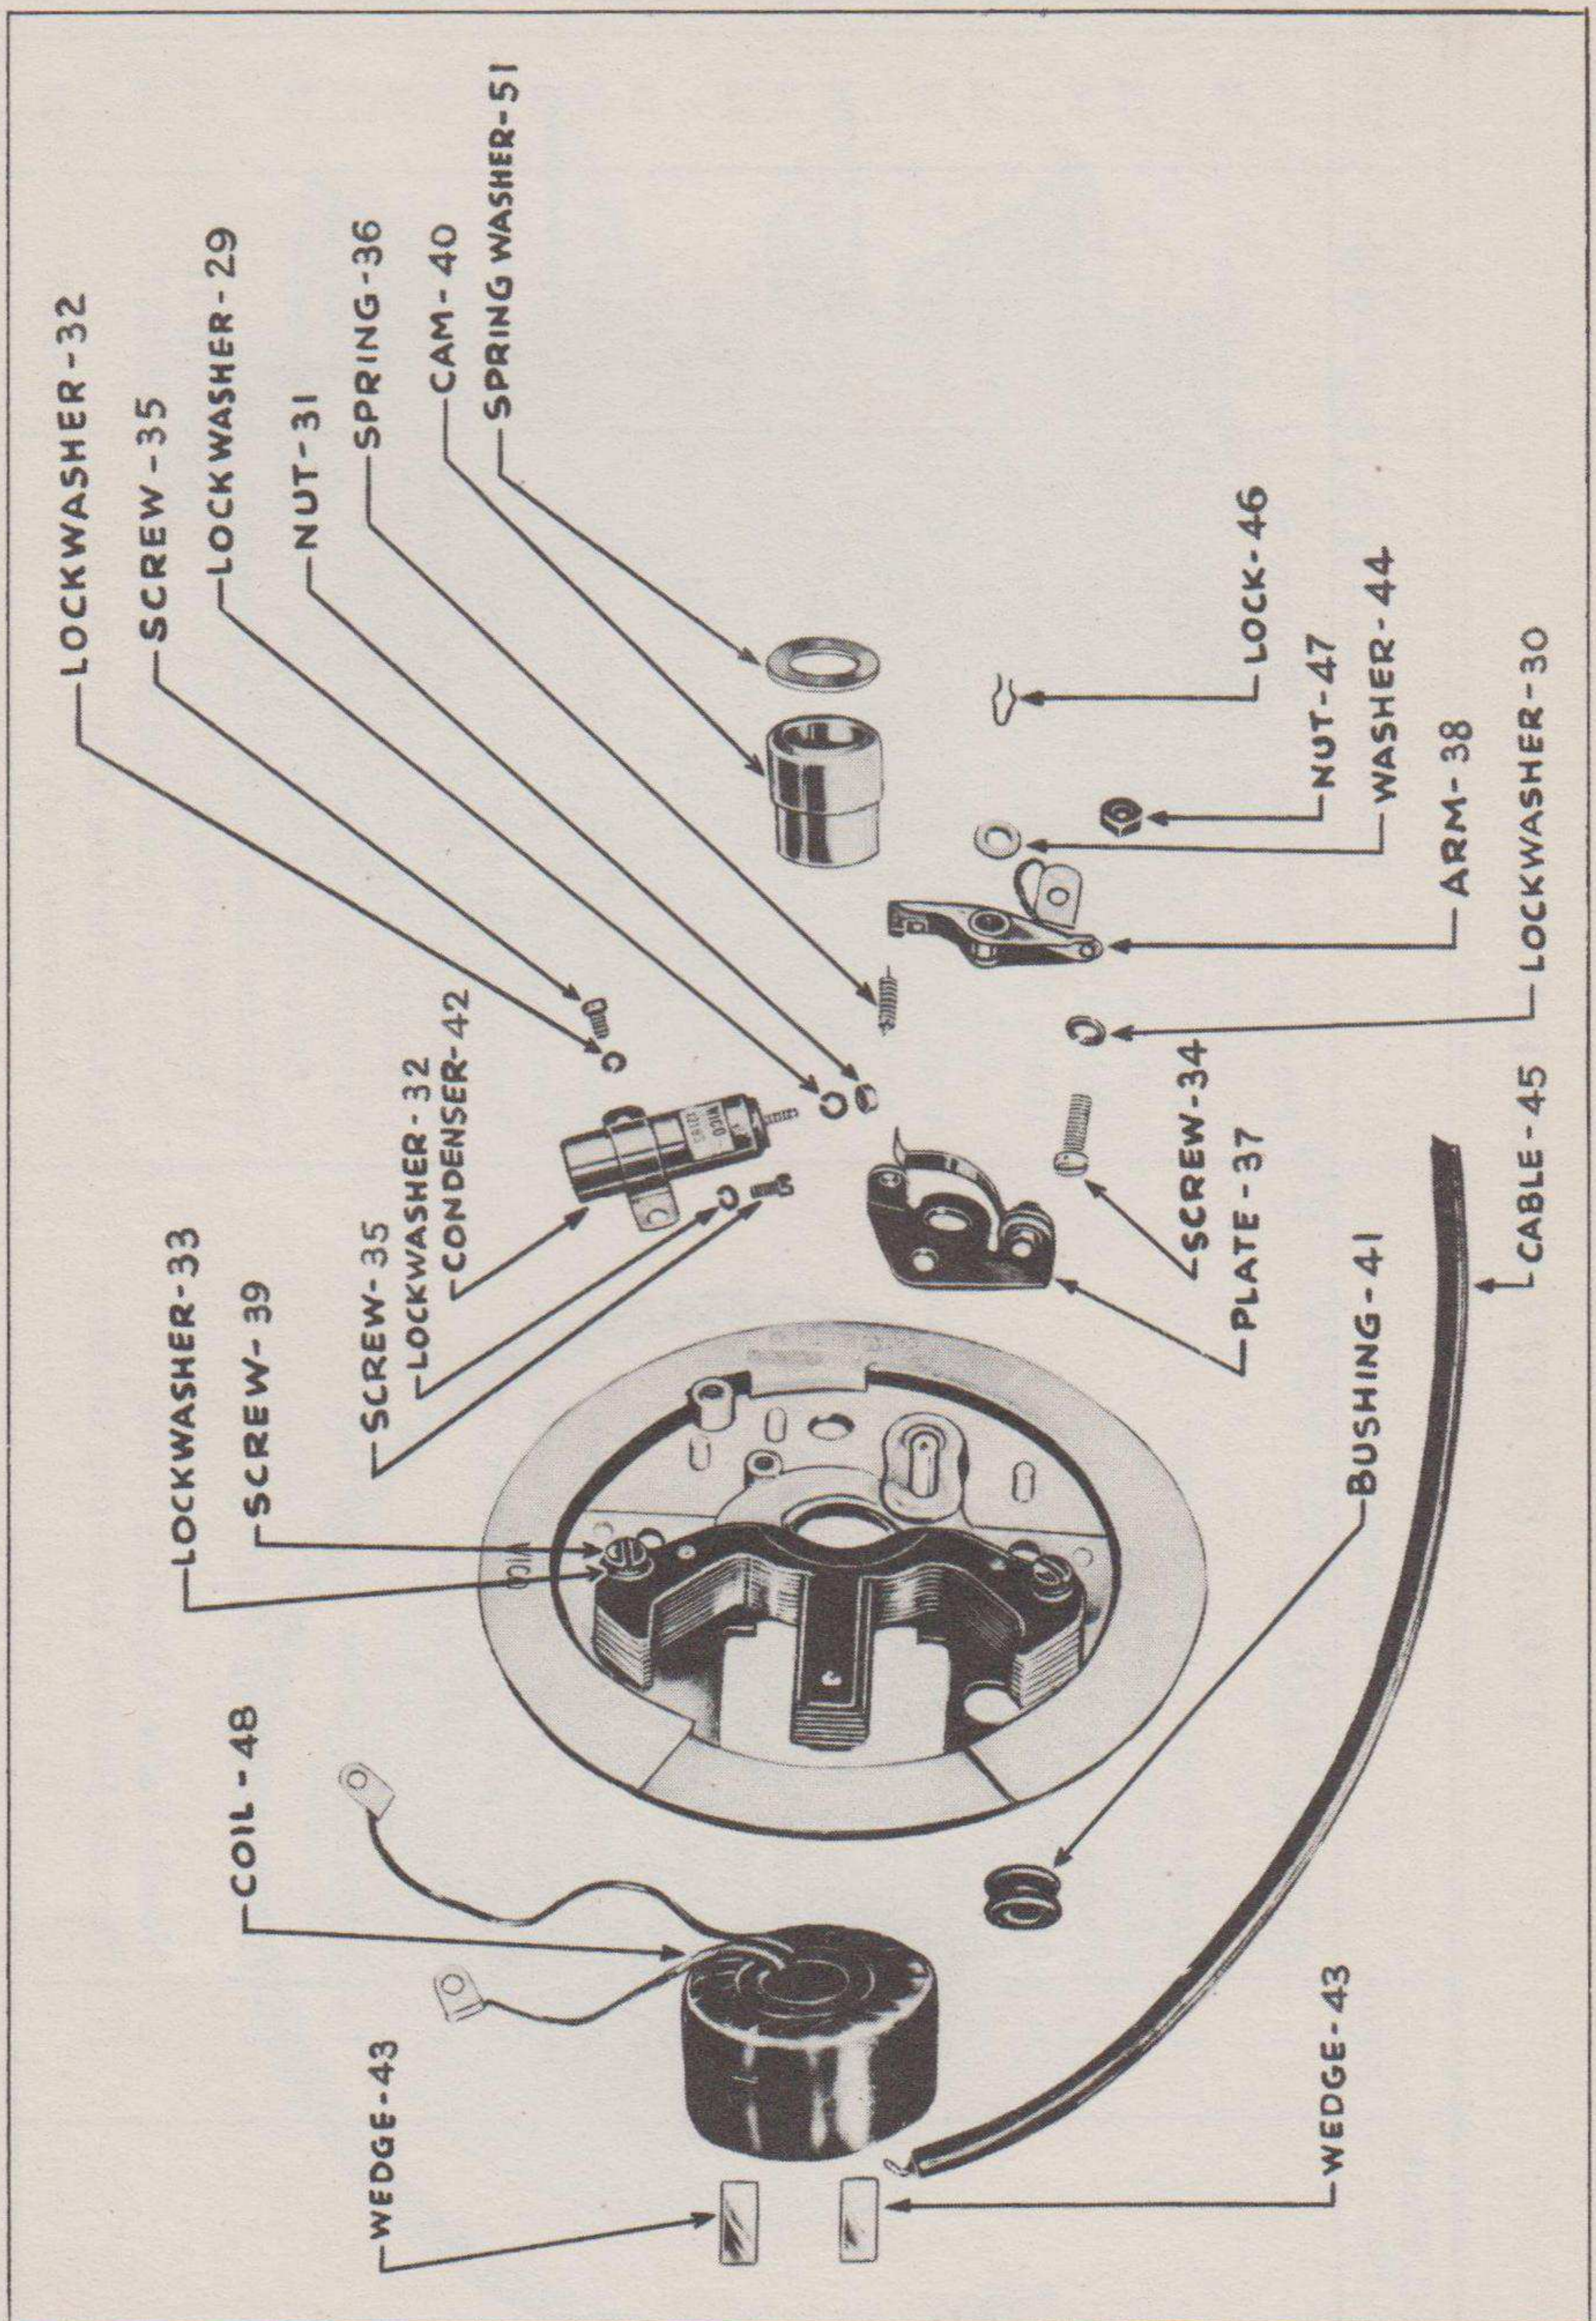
MAGNETO STATOR PLATE ASSEMBLY
